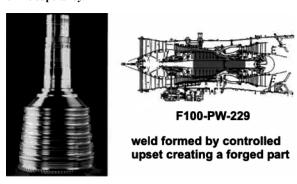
$\,$ F100-229 inertia welded compressor rotor spool and shaft in Inconel 718.
